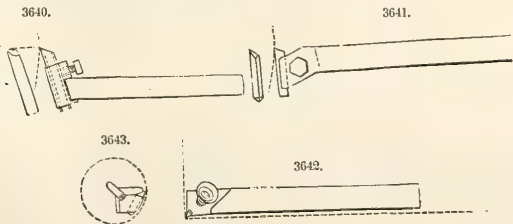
represents a cutter introduced in the block machinery at Portsmouth, England, to lessen the difficulty of making and restoring the tools for turning the wrought-iron pins for the sheaves; it consists of a cylindrical wire which, from being ground off obliquely, presents an elliptical edge; the tool is fixed in a stock of iron, terminating in an oblique hole, with a binding-screw. The tool, when used for iron, in the "pin turning lathes," was made solid; when used for turning the surfaces of the wooden shells, in the "shaping engine," it was pierced with a central hole; the latter could only facili
